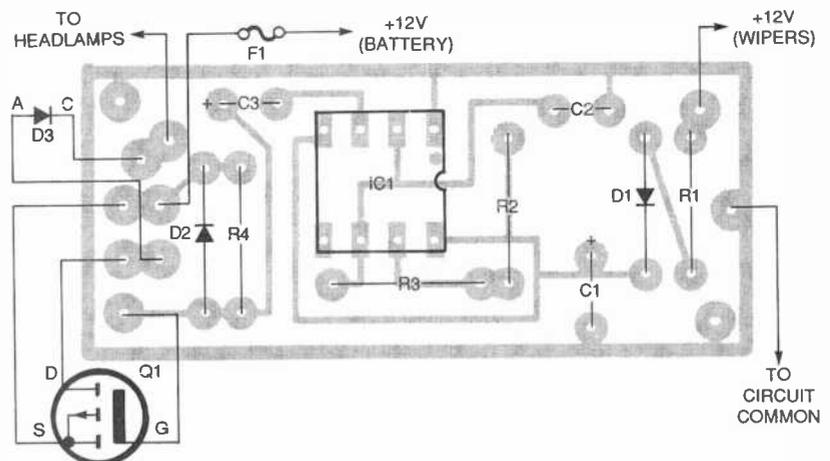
Use this parts-placement diagram as a guide when assembling the Control board. The pins of Q1 and D3 are labeled to make off-board assembly easy.
